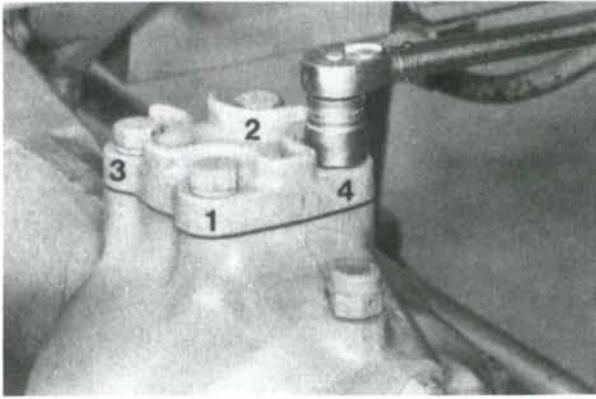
Proper tightening sequence used to install bearing pin cover prior to setting bearing pin preload.
